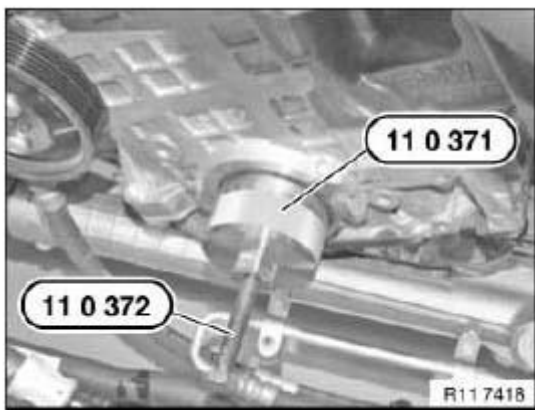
Identifying Special Tool 11 0 371 And 11 0 372
